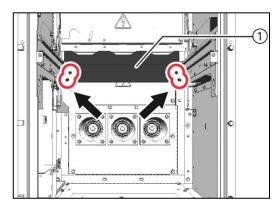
4 bolted joints on protection plate of switching-device compartment
